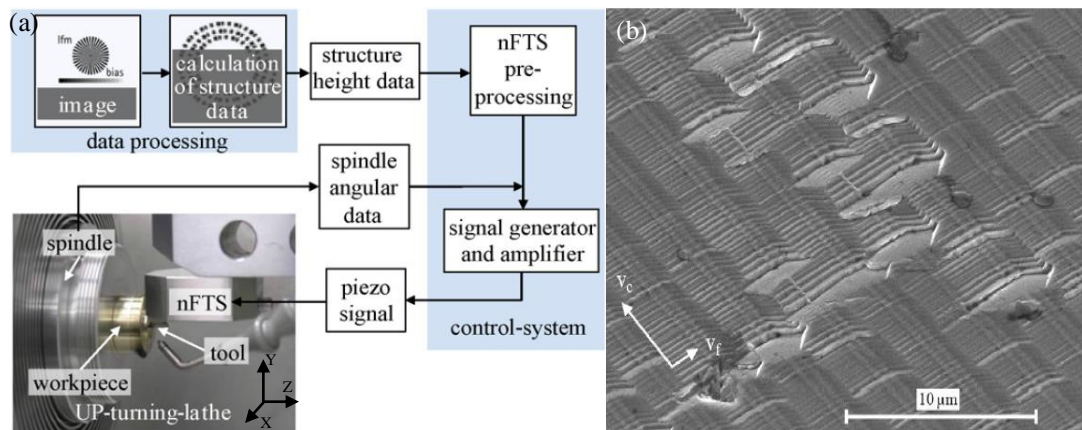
The nFTS assisted diamond machining of diffractive optical elements. (a) nFTS control system and data processing sequence. (b) Diffractive surface generated by nFTS in nickel silver (SEM) [61].
